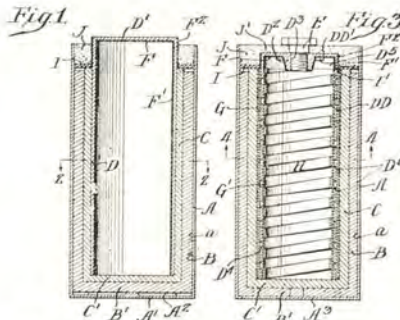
is a sectional elevation of a modified and preferred construction of battery and
